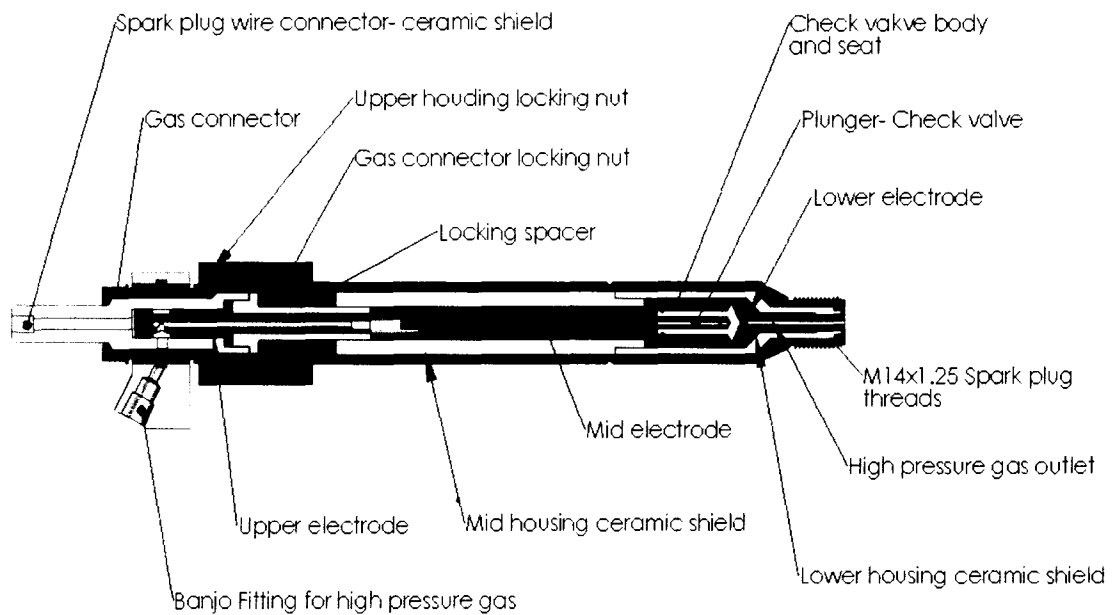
Section view of sparkplug injector with external solenoid valve
